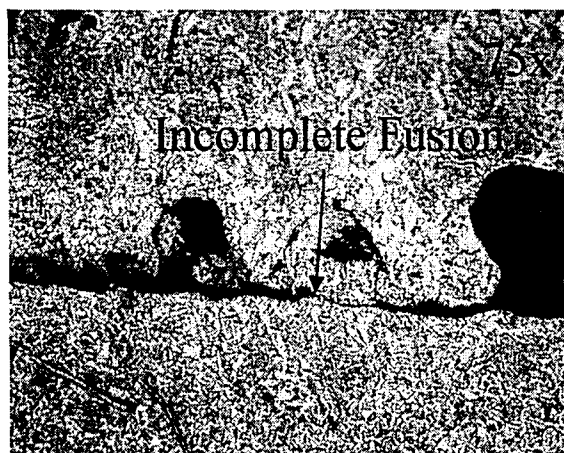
Incomplete Fusion in Specimen 36-8, Bottom-right section
